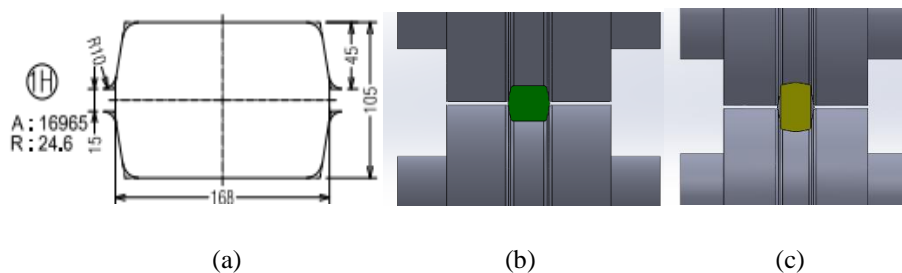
Detailed geometry definitions: (a) 2D schematic of the roll pass groove, (b) Input billet cross-section (A0), and (c) Output billet cross-section (A1).
